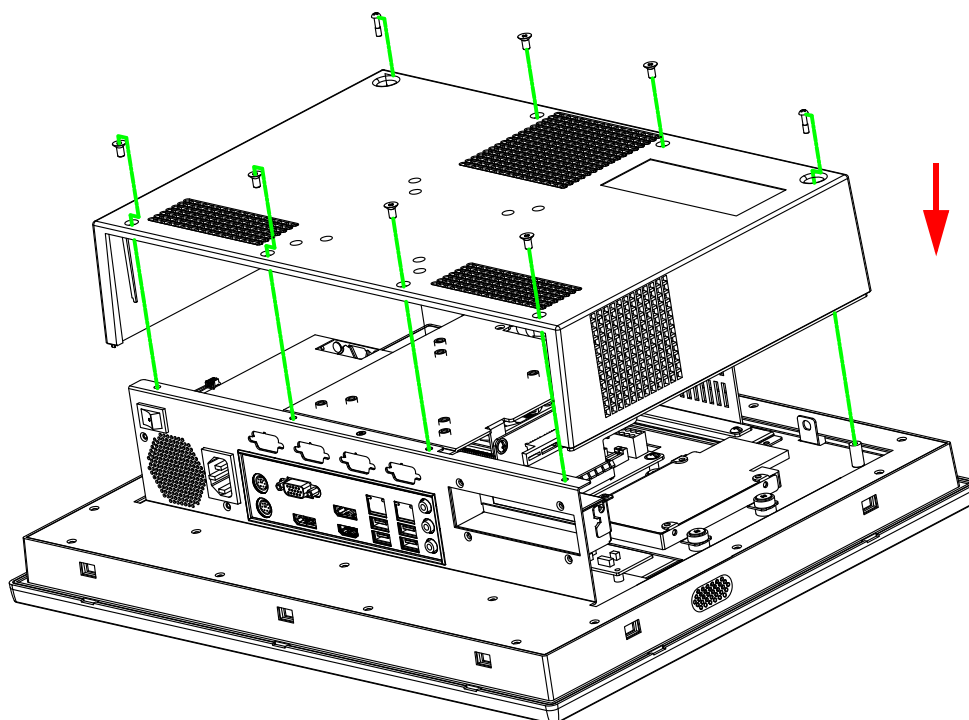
Reinstall the rear cover / 安装后盖 / 安裝後蓋
